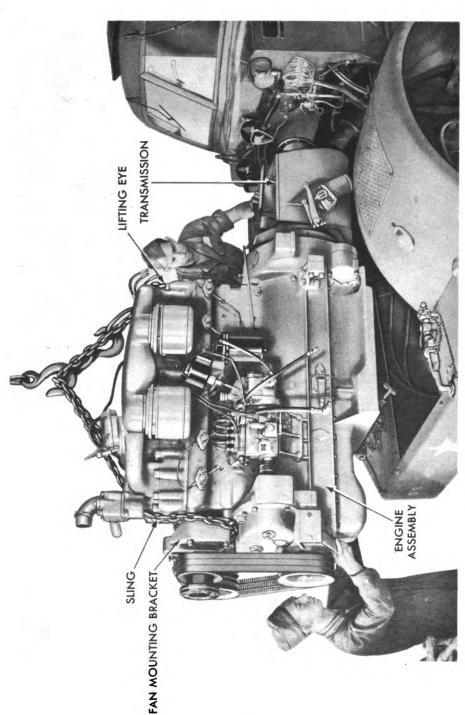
Removing Engine, Using Special Lifting Eye (41-E-626)
